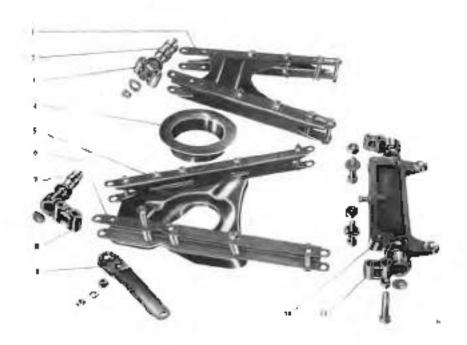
Triangle lewirs, fulcrum boshes and bearing blocks - S1 cars
